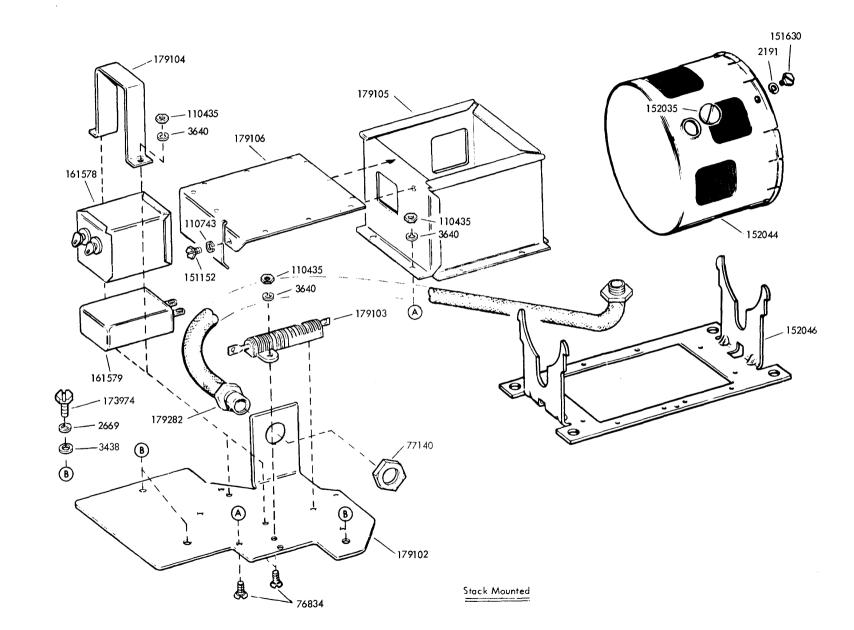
SERIES MOTOR MOUNTING PARTS
